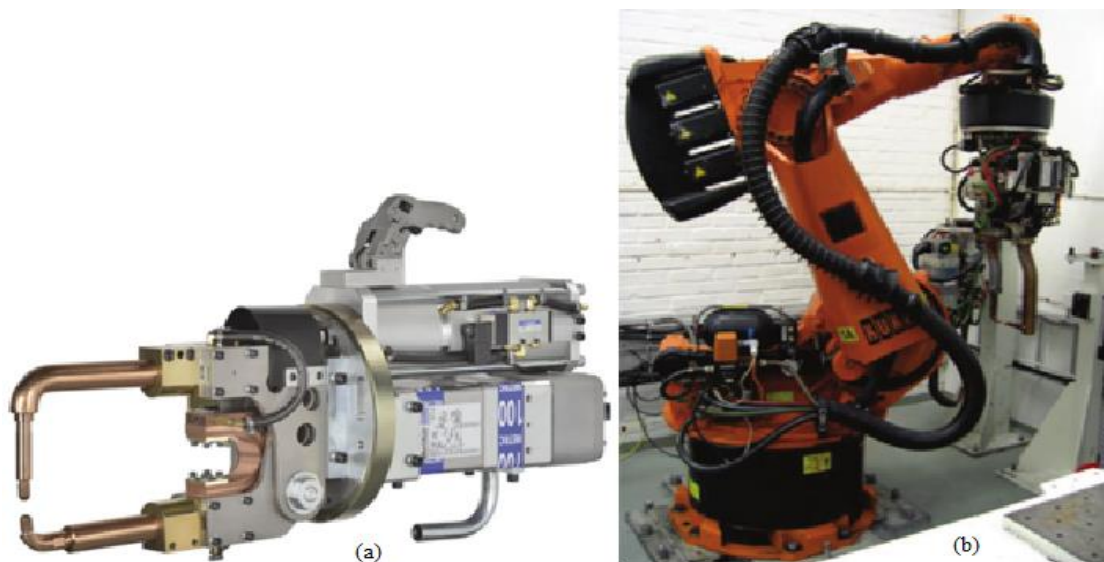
(a)Manual portable spot welding gun (b) Portable spot welding gun on robot (automatic) [1].
